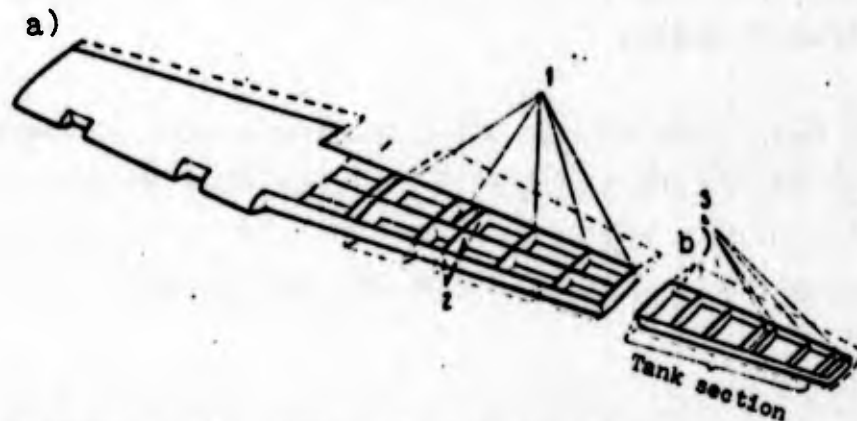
Wing of the IL-18 aircraft only the reinforced ribs are shown): a) center section; b) the removable part of the wing; 1 - flap suspension assemblies; 2 - main landing strut attachment units; 3 - aileron suspension assemblies.
